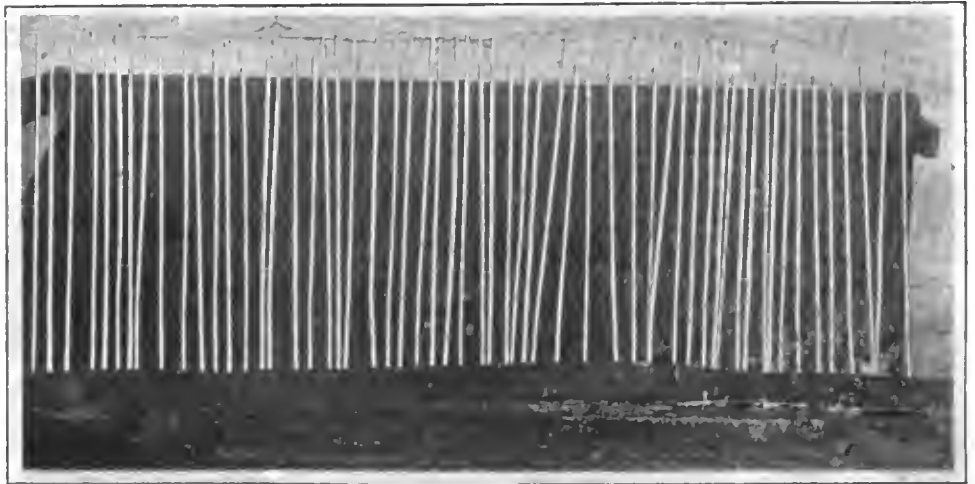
Tubes, after they are cut to length, dipped in solder, and placed in a rack to drain and cool off before they are assembled
